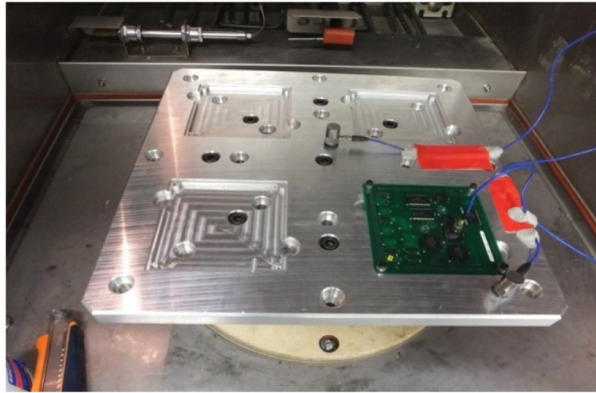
CBA mounted to aluminium test fixture mounted on the vibration table [19].
